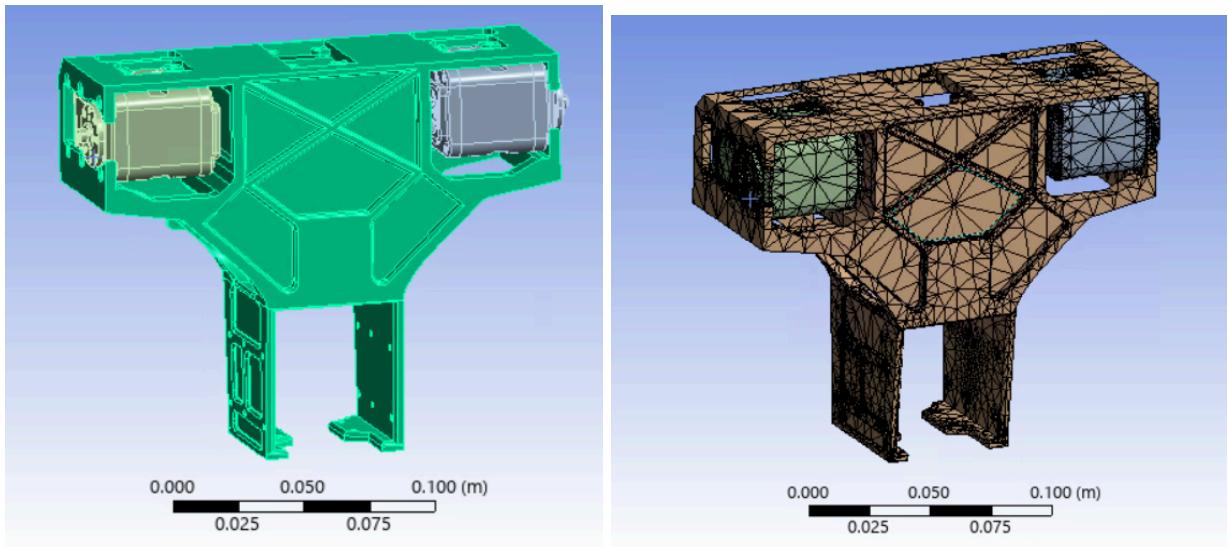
Model of new robot chest chassis design in isometric view (Left) and with Ansys generated mesh (Right)
